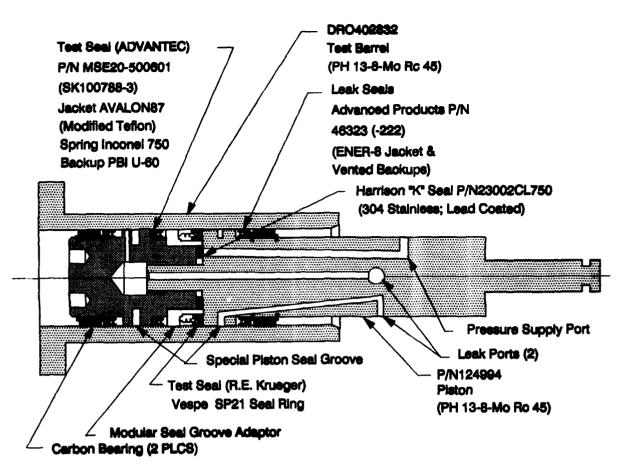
ORIGINAL PISTON SEAL TEST MODULE
